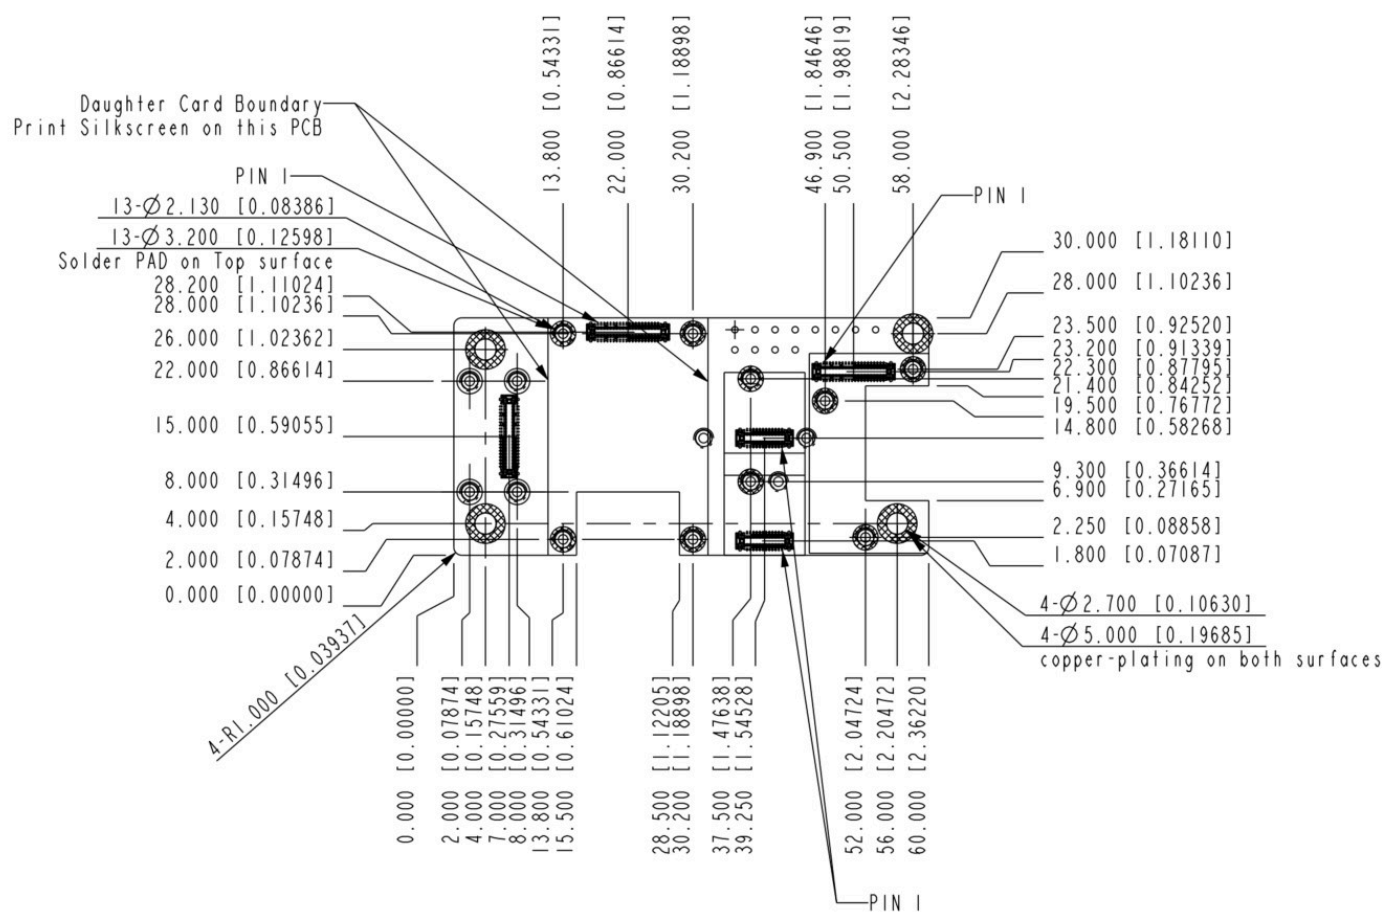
RAK19010 mechanical dimensions and mounting holes locations
